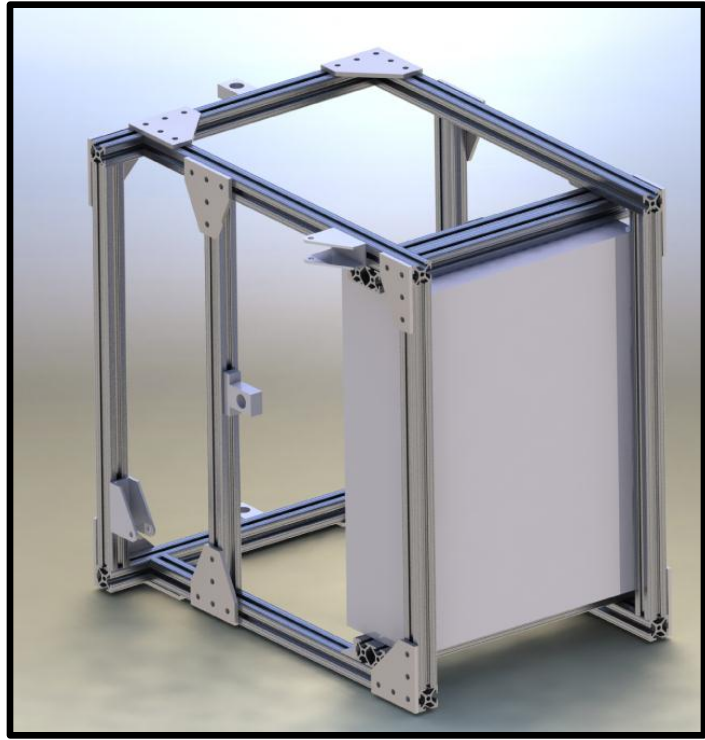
TRAVELER & COUNTERWEIGHT ASSEMBLY
